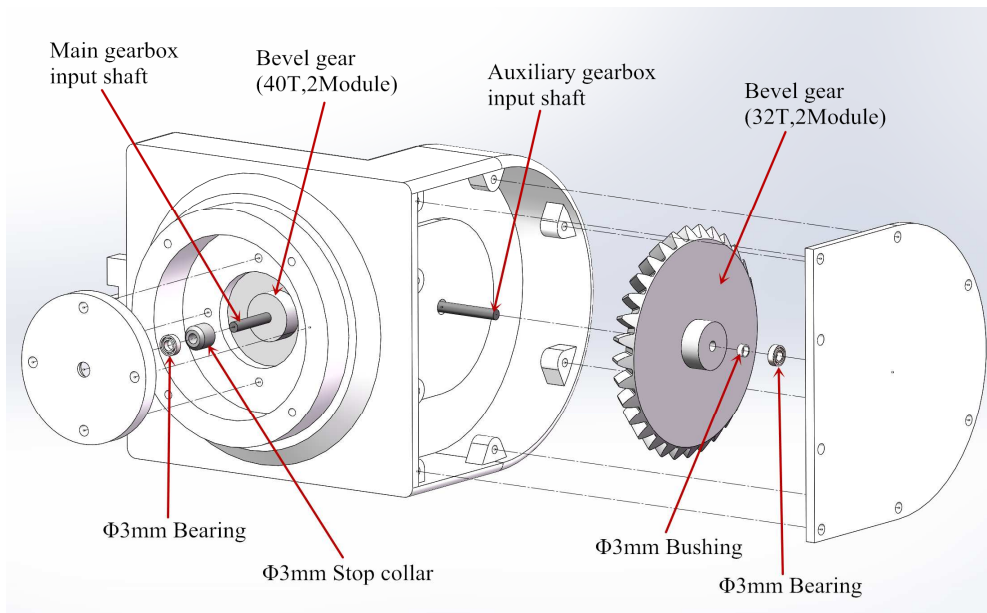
The assembly process of the main gearbox and the auxiliary gearbox
